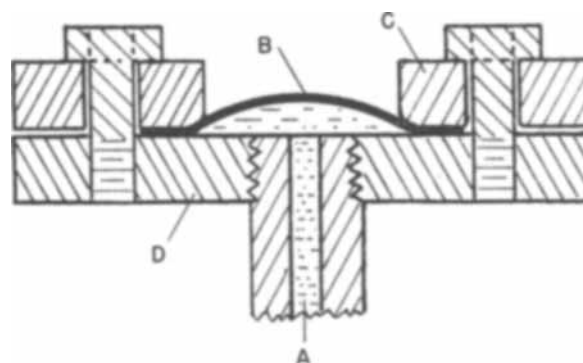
I. Cross section of head of bulge tester: A—oil inlet, B—bulged disk, C—clamping ring, D—base plate.
